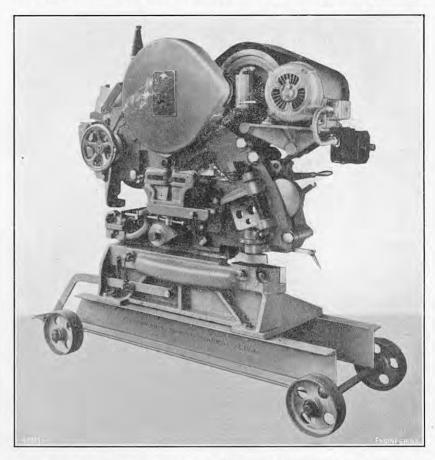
Punching, Shearing and Notching Machine; F. J. Edwards, LIMITED.
